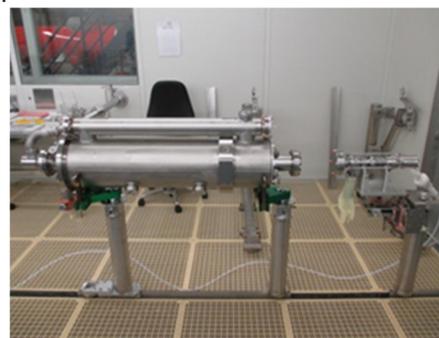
Assembly tool with a bellow unit installed on the extra post.
